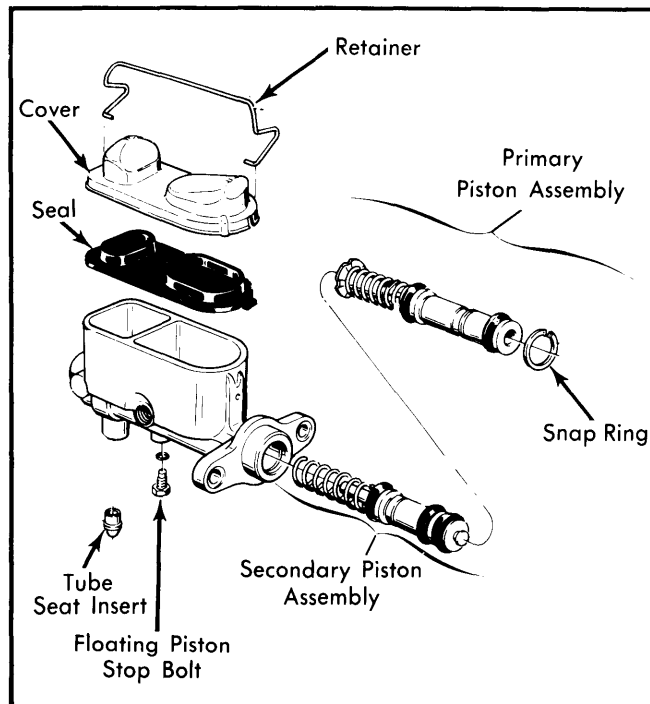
Typical Bendix Master Cylinder Ford Motor Co. Shown
